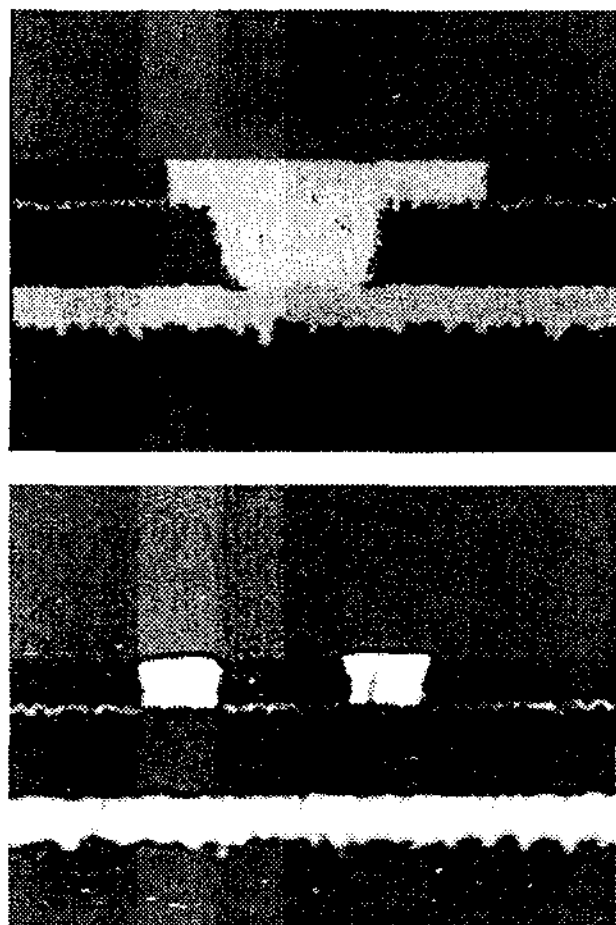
The picture of cross section of pattern and hole which are printed under vacuum condition of 100 Pa.
